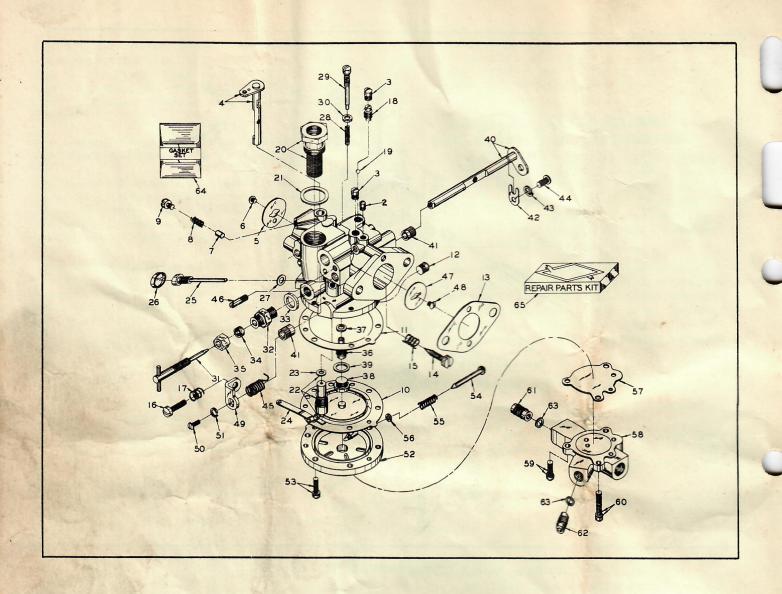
DIAPHRAGM CARBURETOR - EXPLODED
